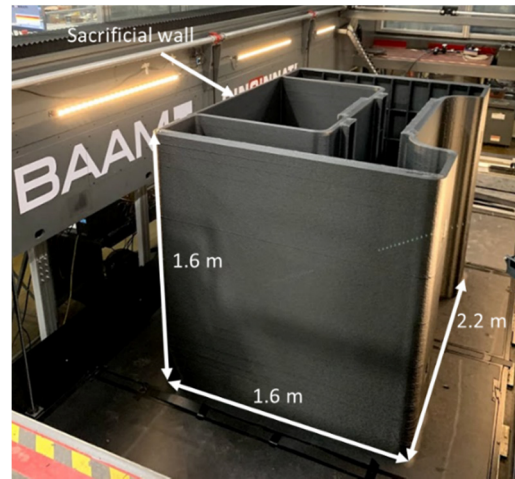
Polymer mold in the print-and-pour orientation. The front face of the machine is the bottom of the mold as shown.
